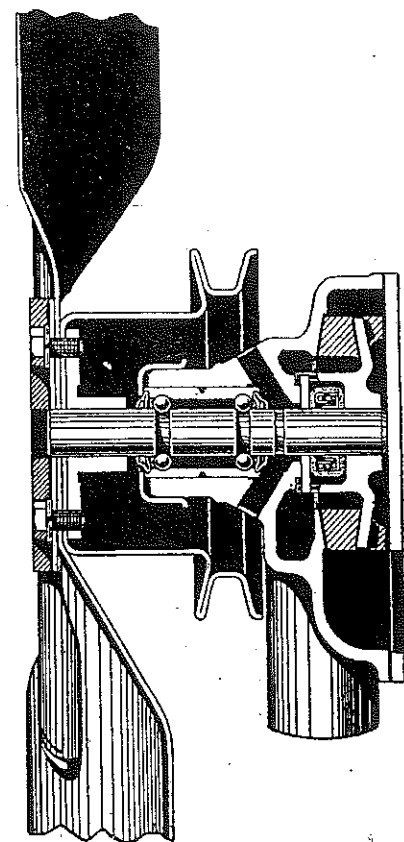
Water pump on 228, 236, 248, 256 and 270 engines
